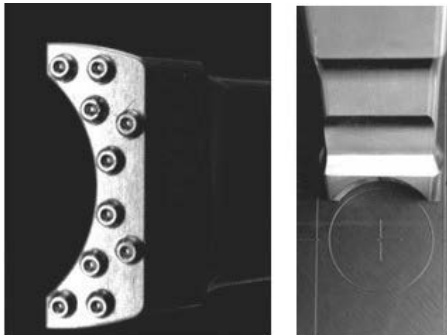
45° welding, crescent sonotrode (courtesy of the PPtech company)
